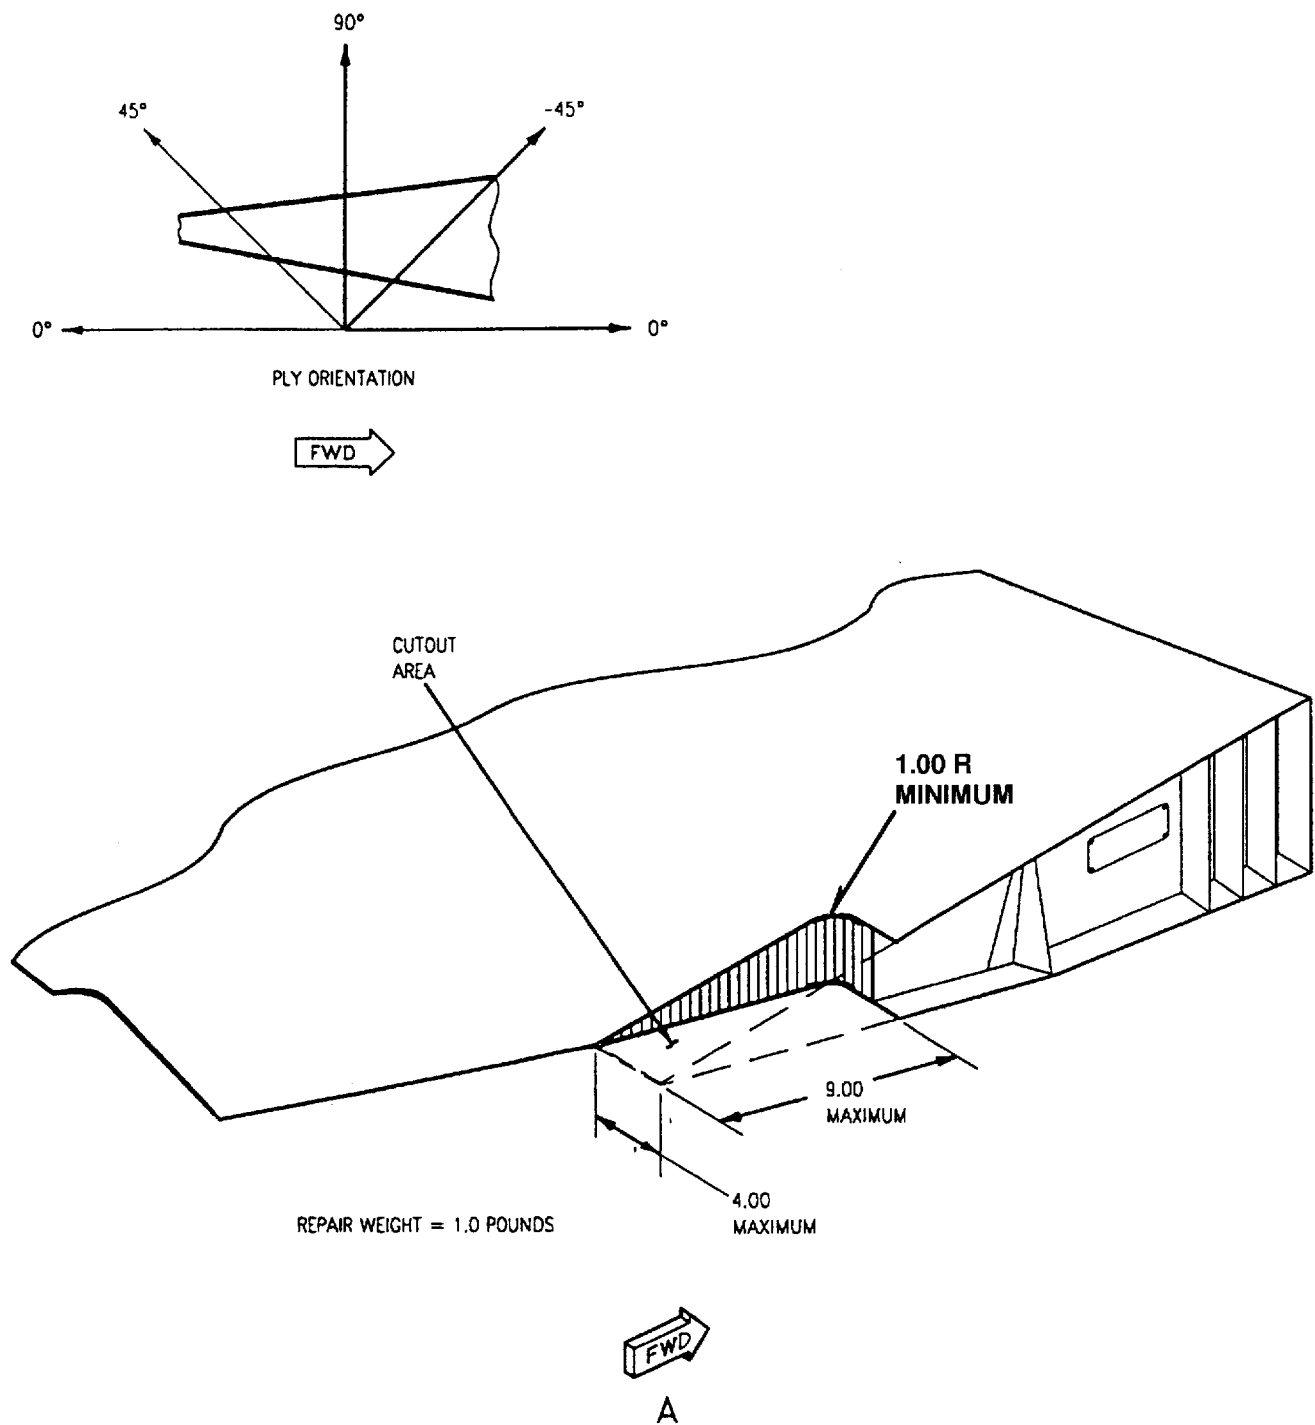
Inboard Aft Closure Rib and Skin Damage Repair (Sheet 2)
